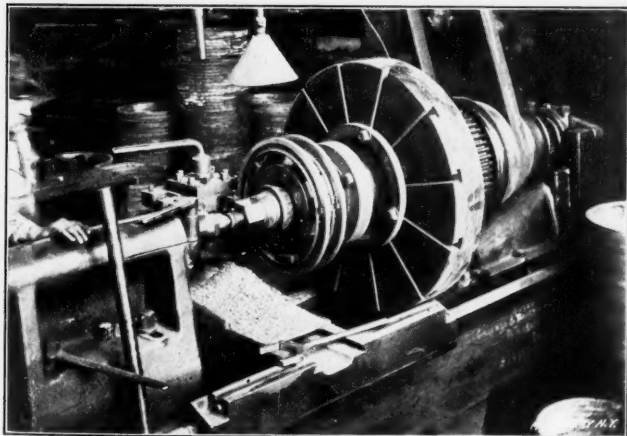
Finishing Two Piston Rings simultaneously on an Expanding Mandrel
